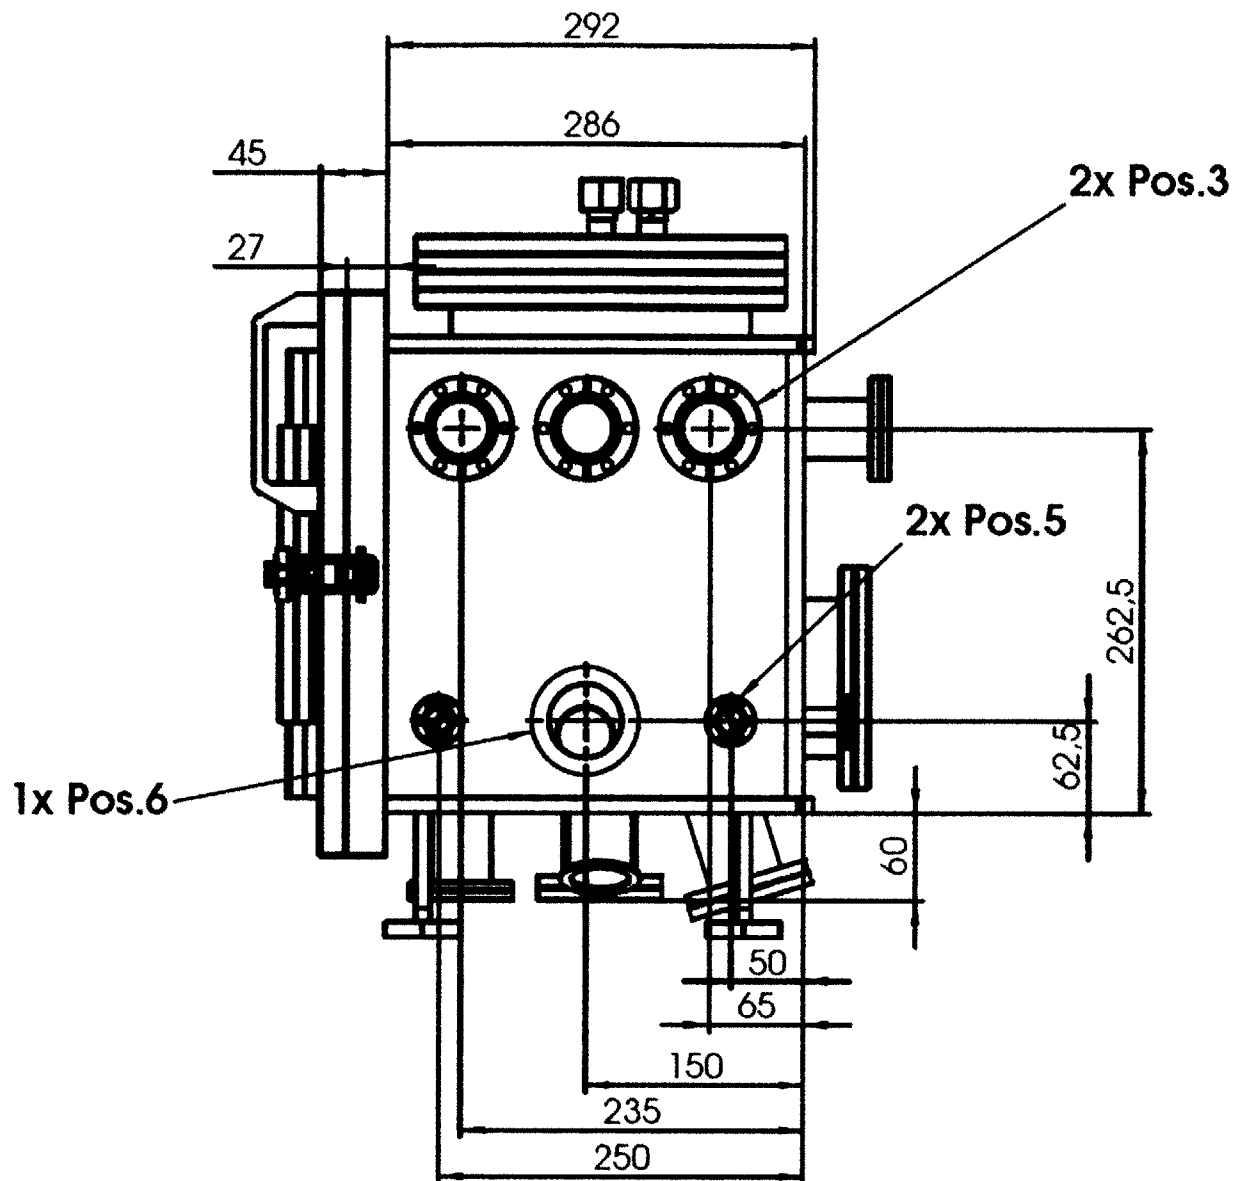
oCVD chamber engineering drawings – close-up of right side of chamber
